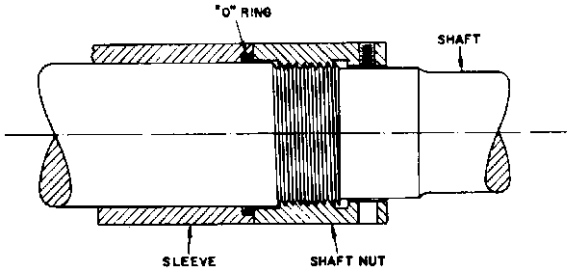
A seal arrangement for the shaft sleeve to prevent leakage along the shaft
